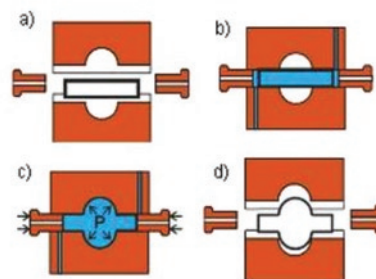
Schematic diagram of the hydroforming operation: a – putting the pipe in the die, b – introducing a fluid inside the pipe, c – forming the pipe shape under fluid pressure, d – discharging the fluid and taking the formed part out of the die
